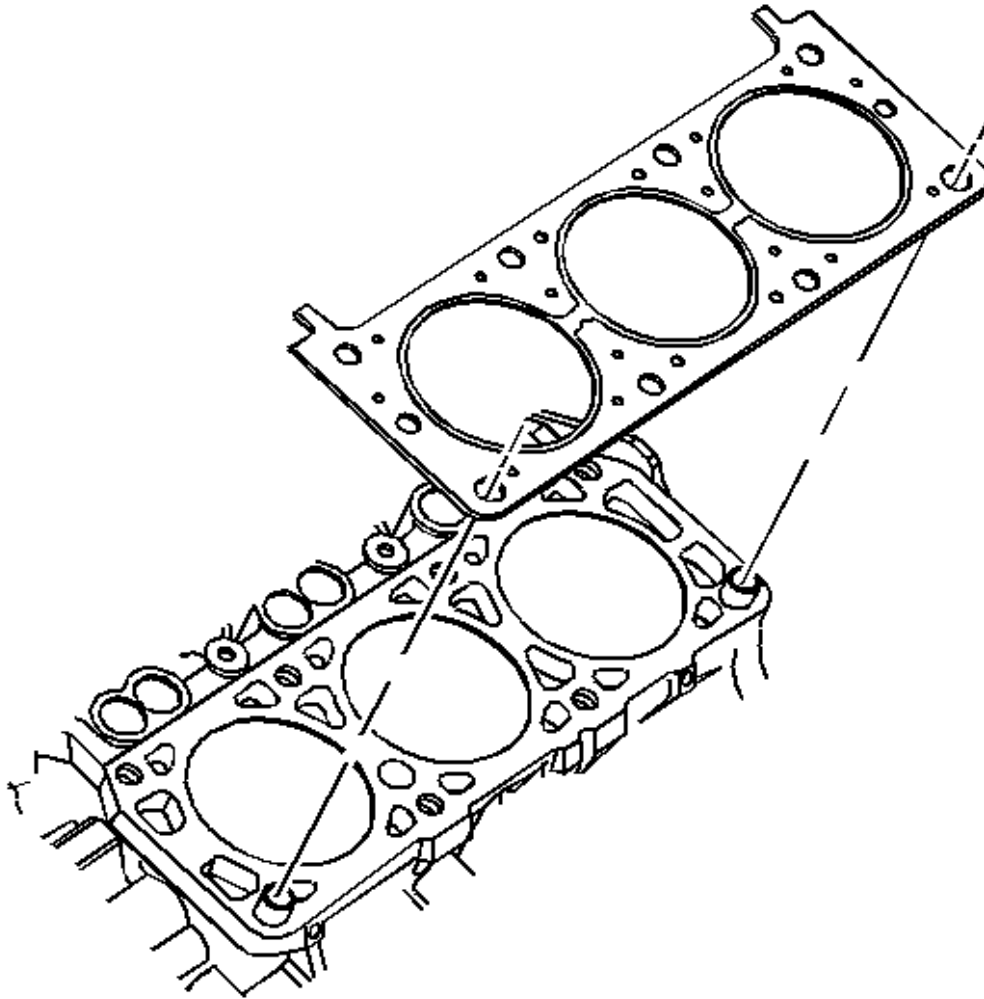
View Of Cylinder Head Gasket & Alignment Pins
